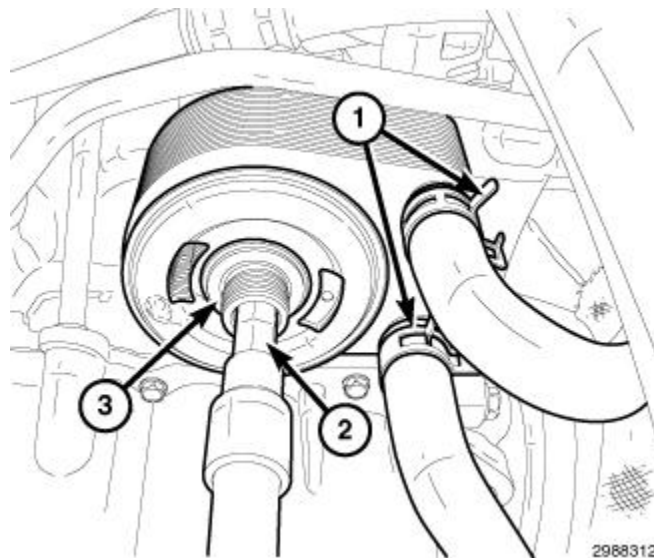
Clamps, Allen Wrench Socket & Oil Cooler Retaining Bolt
